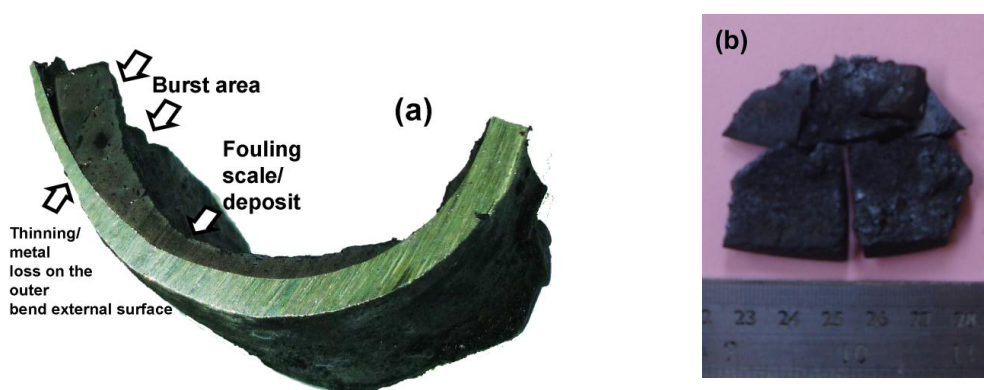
(a) Appearance of some internal deposits that formed on the outer bend inner wall of the burst return bend. (b) Note some collected fouling deposit that obtained from the outer bend internal wall
